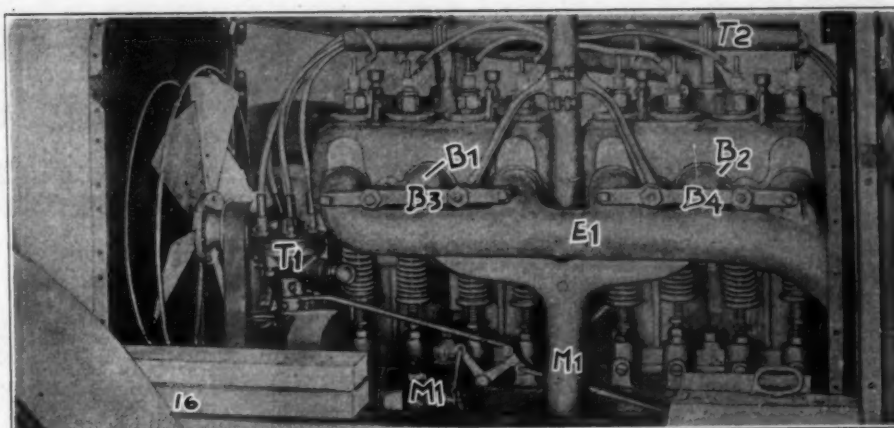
Thirty-five horsepower Moline motor, magneto side, shown in chassis
